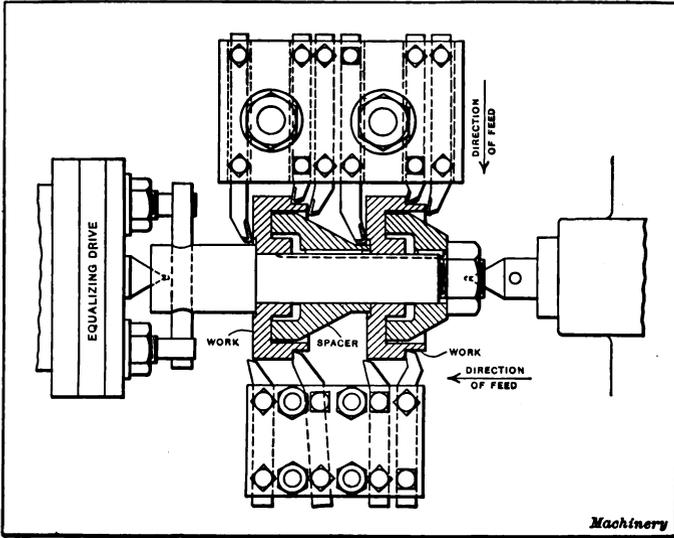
Example of Two Pieces clamped on Arbor, illustrating Use of Spacer
